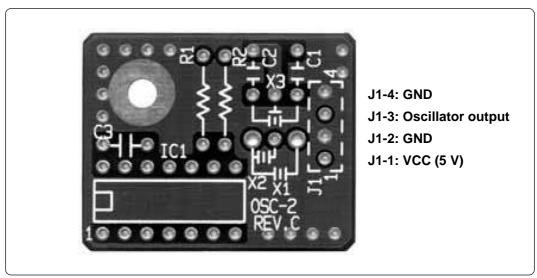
External view of the oscillator board (OSC-2) and connector pin assignment
